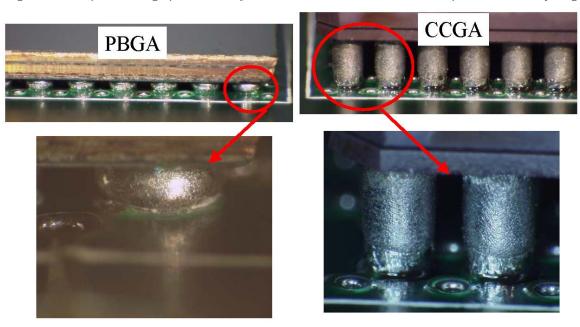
Optical Photomicrographs of PBGA and CCGA after Assembly
